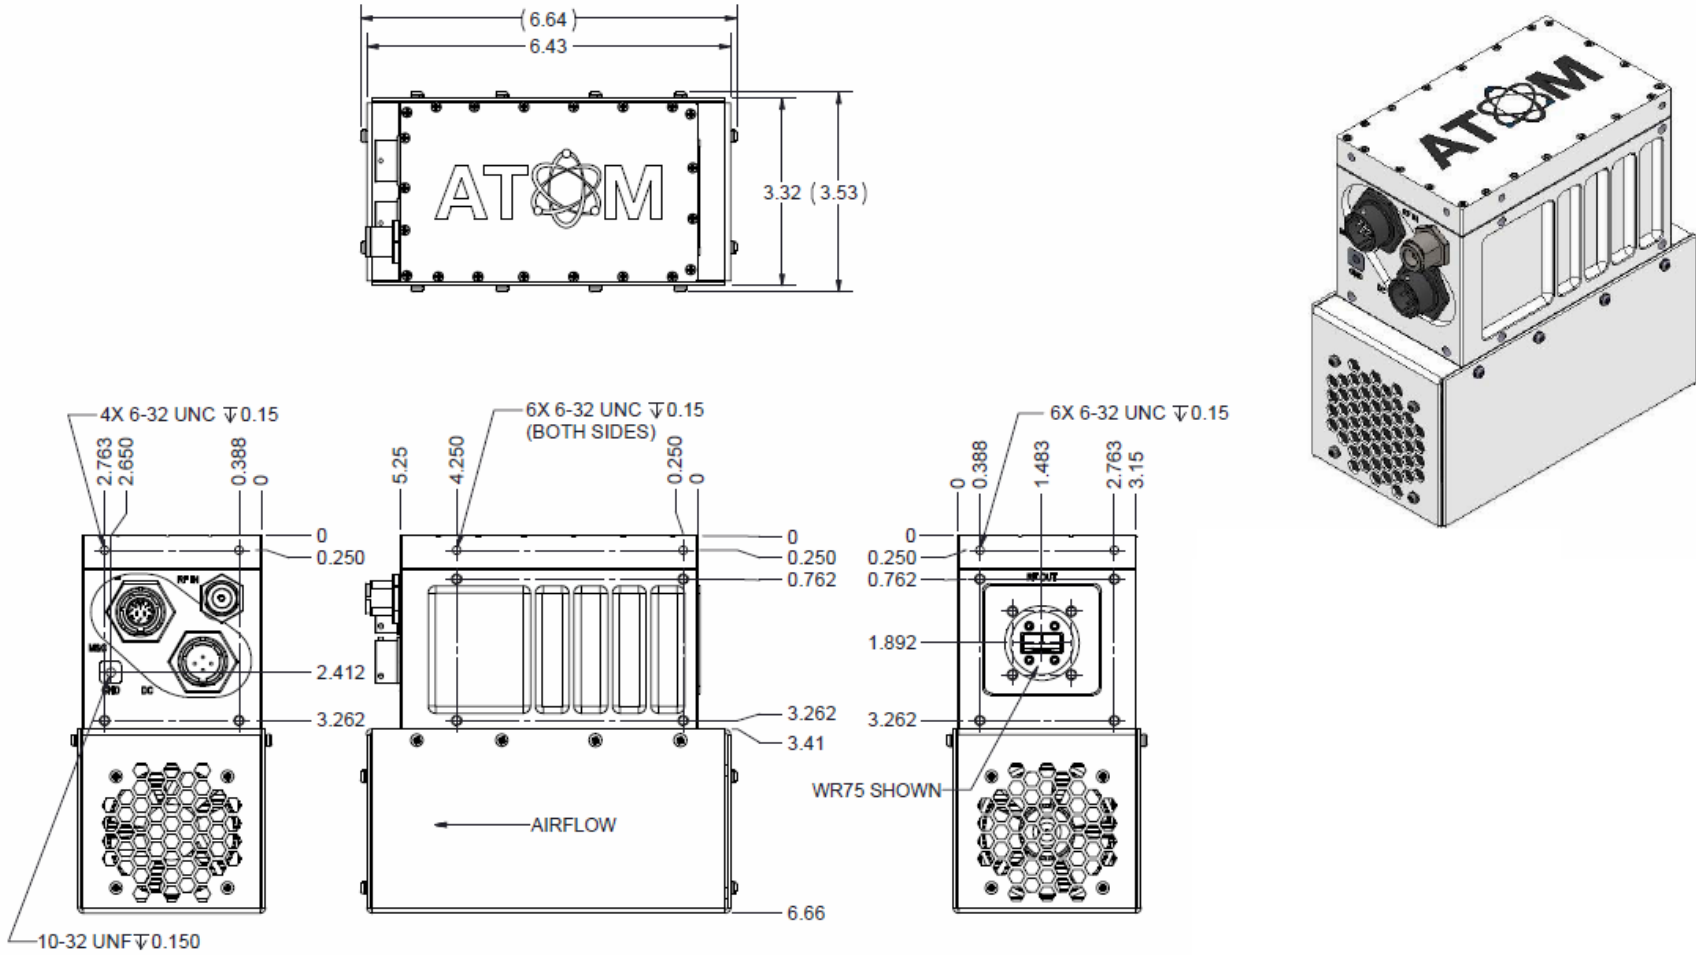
40W and 50W KU SSPA/BUC Assembly, with Fans
